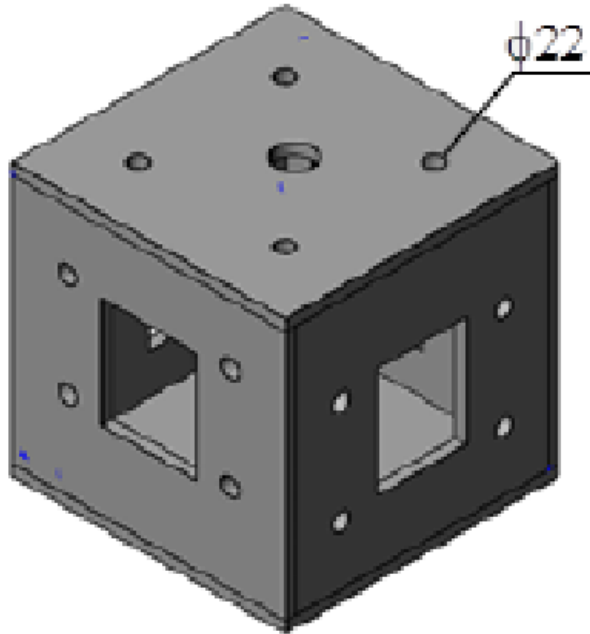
Steel bracket connection (Hwan Doh et al., 2017)
